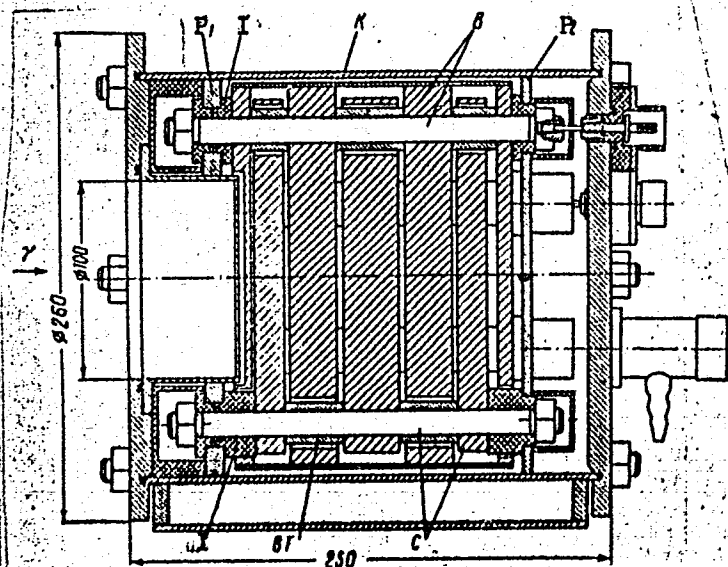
Construction of new quantum meter. B -- high voltage electrodes; C -- gathering electrodes; BT -- spacer bushings; I -- insulators; K -- outer jacket; P₁, P₂ -- front and back panels of the quantum meter.
